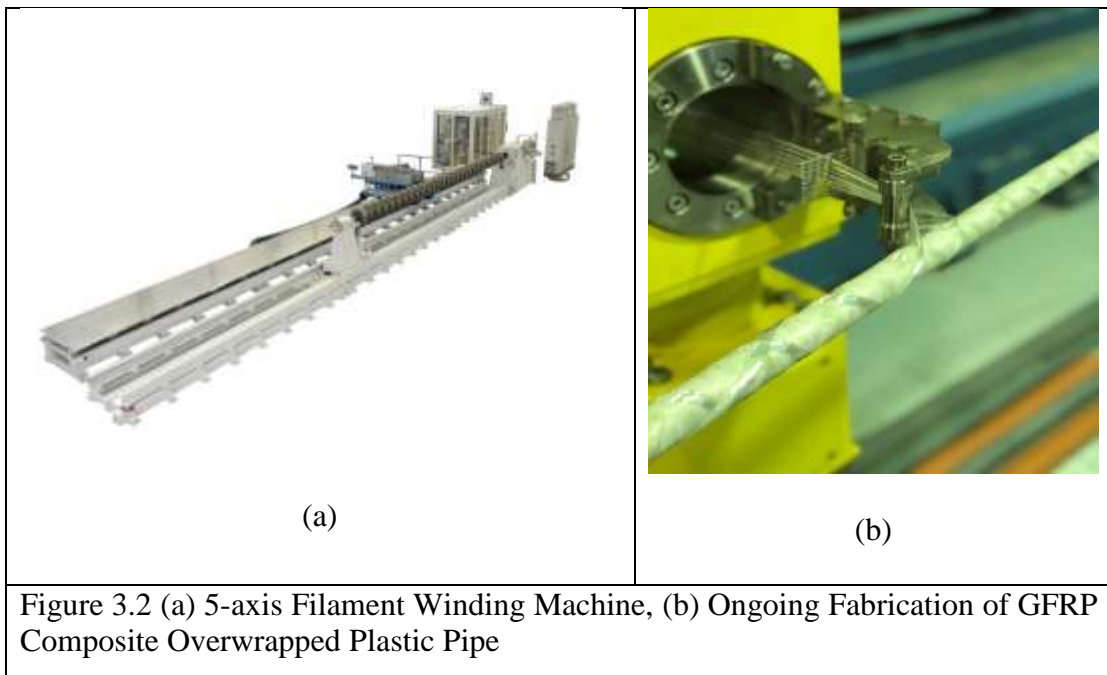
(a) 5-axis Filament Winding Machine, (b) Ongoing Fabrication of GFRP Composite Overwrapped Plastic Pipe
